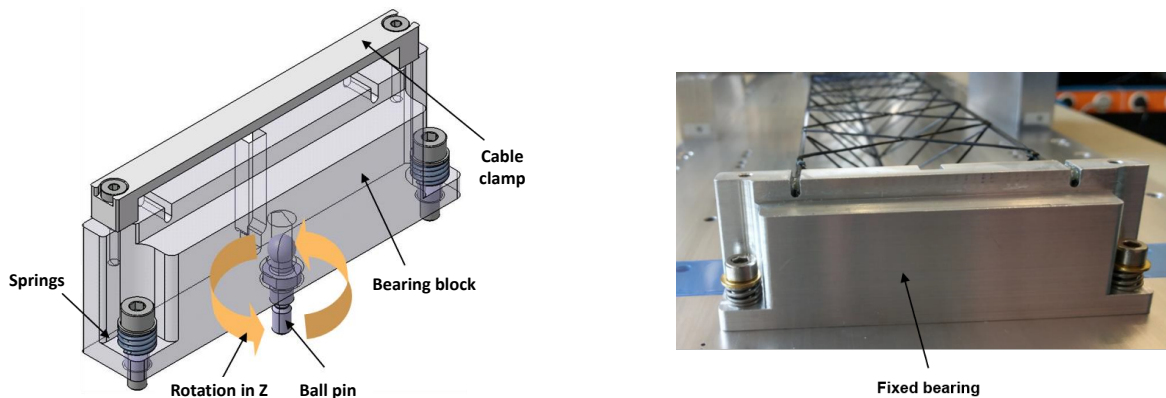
(Left) CAD drawing of the fixed bearing with all the components labeled, (Right) Fixed bearing holding the edges of the ladder from one side.
